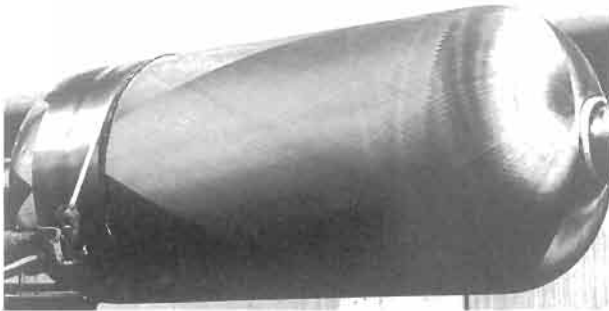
Winding of a circumferential layer. Courtesy of CRISM.
